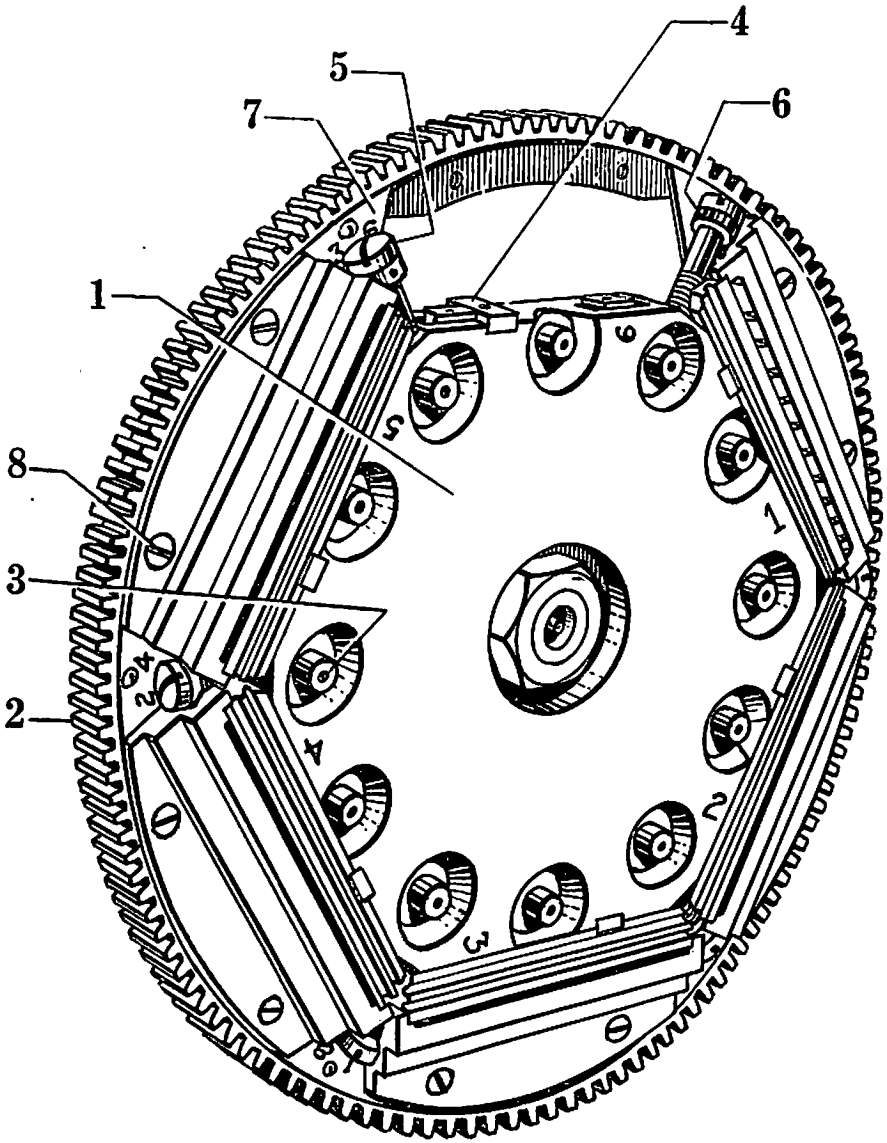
Perspective View of the Six-Mold Disk. One of the molds has been removed to show the means provided for locating and fastening the molds in position.
